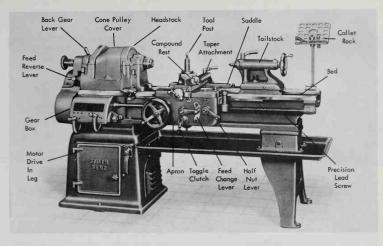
Principal parts of a metal lathe. (South Bend Lathe)
